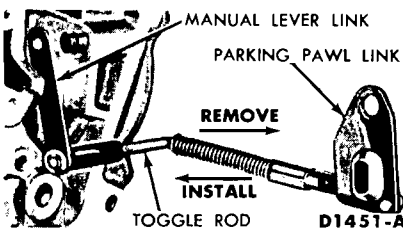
Removing or Installing Parking Pawl Toggle Rod
